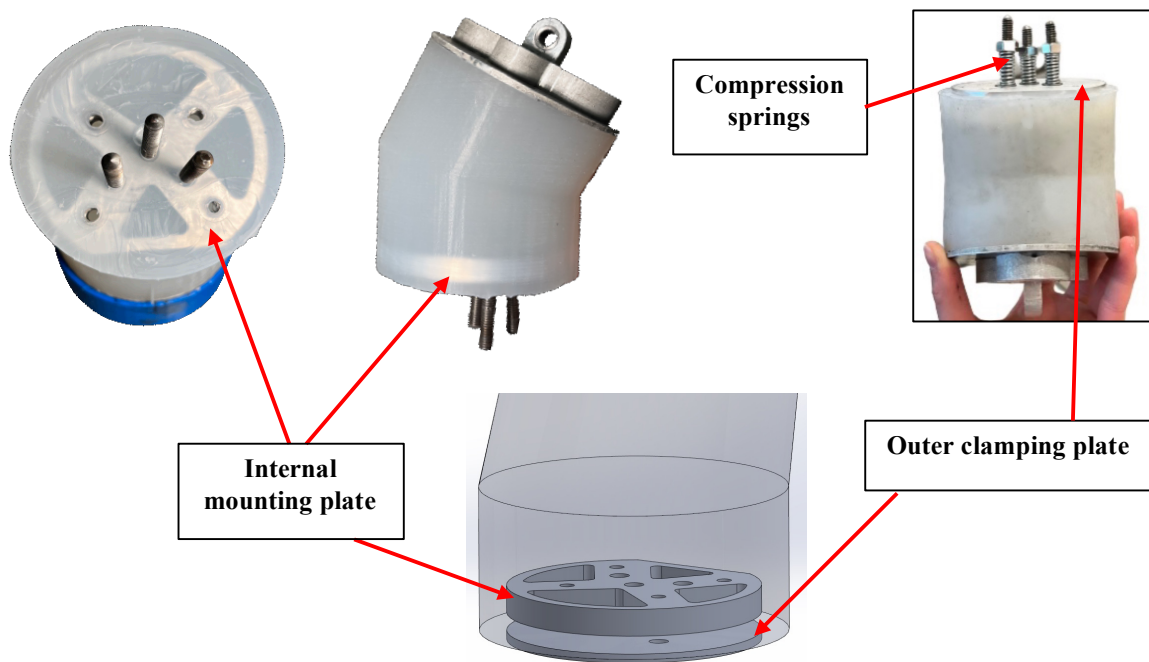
The Phase III surrogate neck, with illustration of the internal aluminum mounting plate (top left and center) and the compression springs and outer clamping plate (top right). A CAD image of the internal mounting plate and outer clamping plate (bottom).
